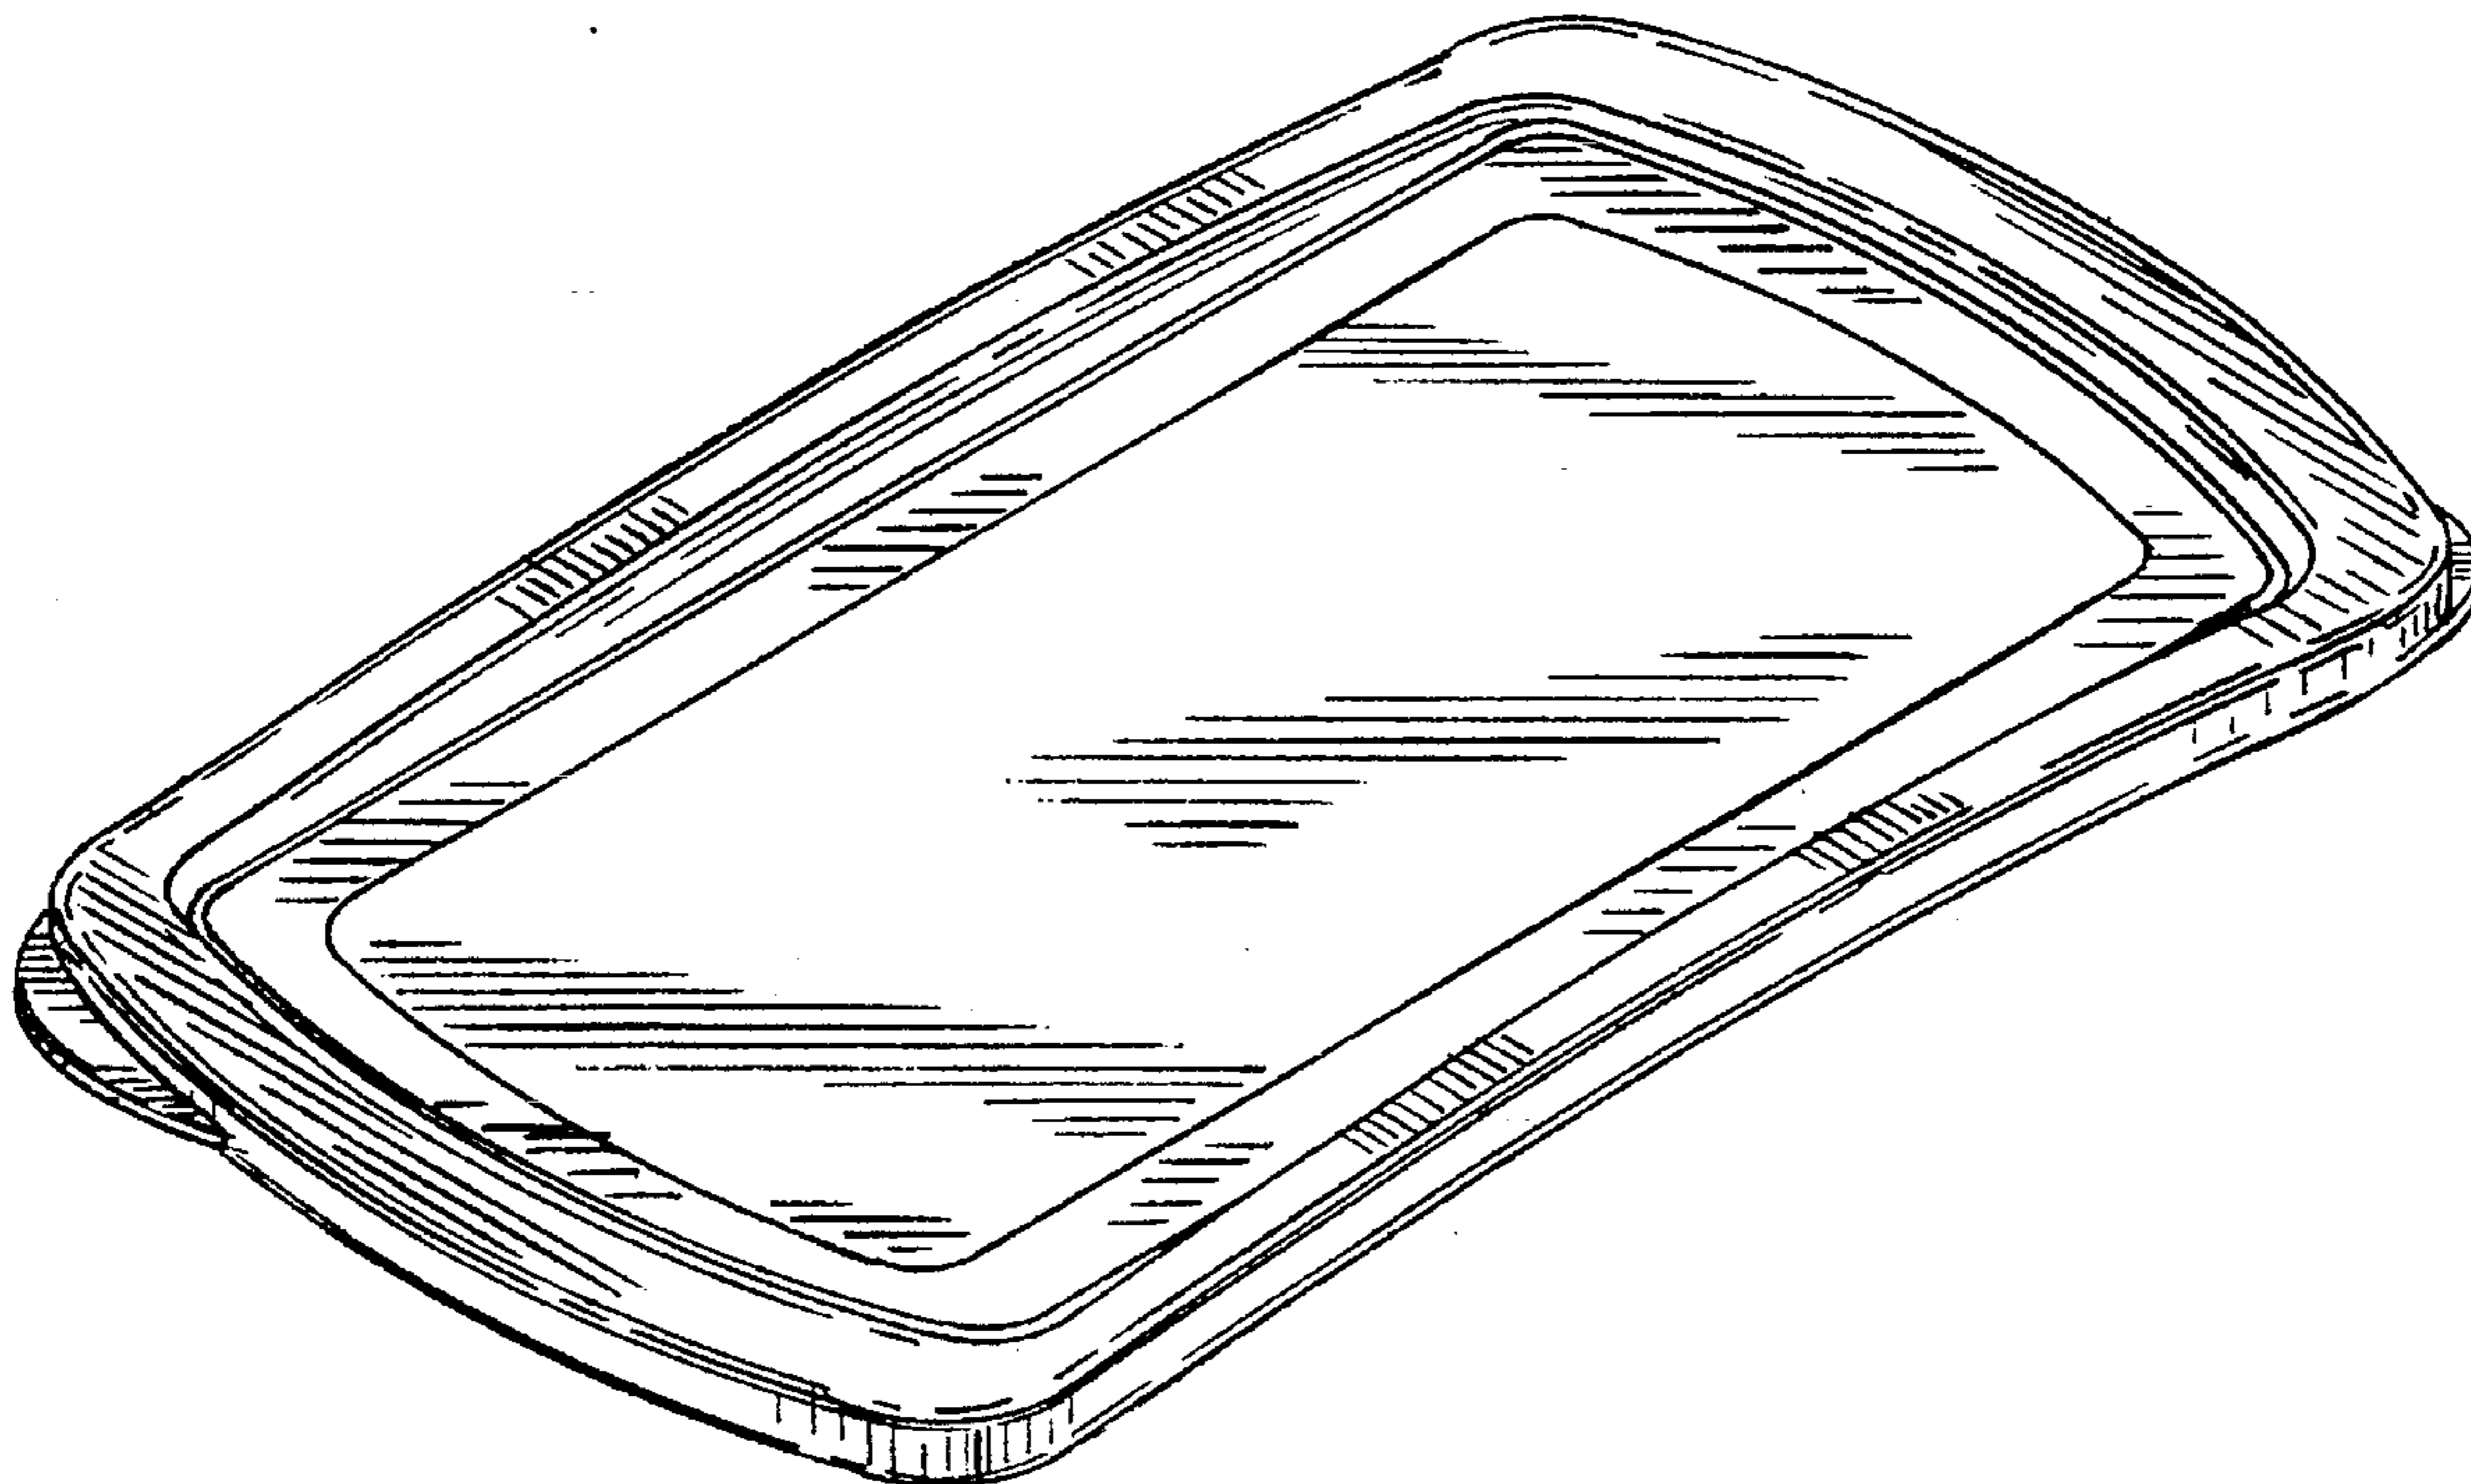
is a top, front and side perspective view of a seal for food container showing my new design;
